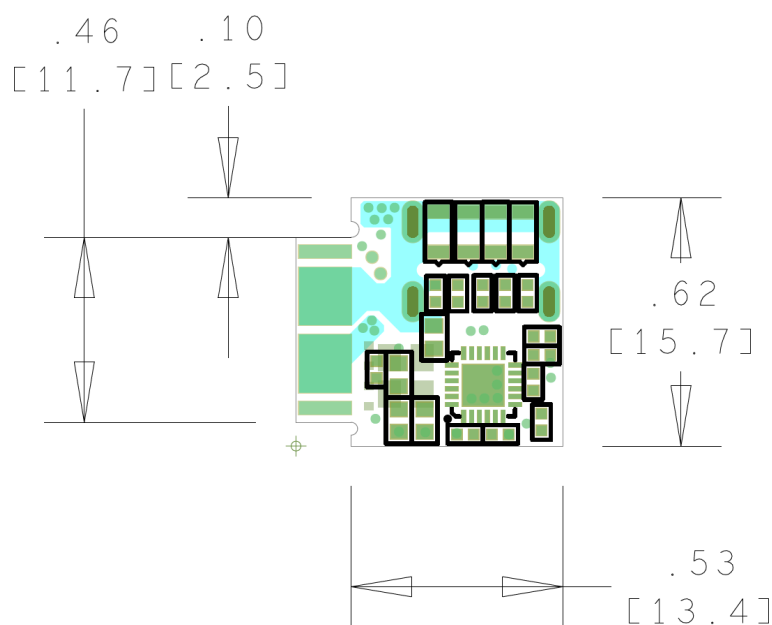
Active Bridge Board Printed Circuit Layout, Top.
